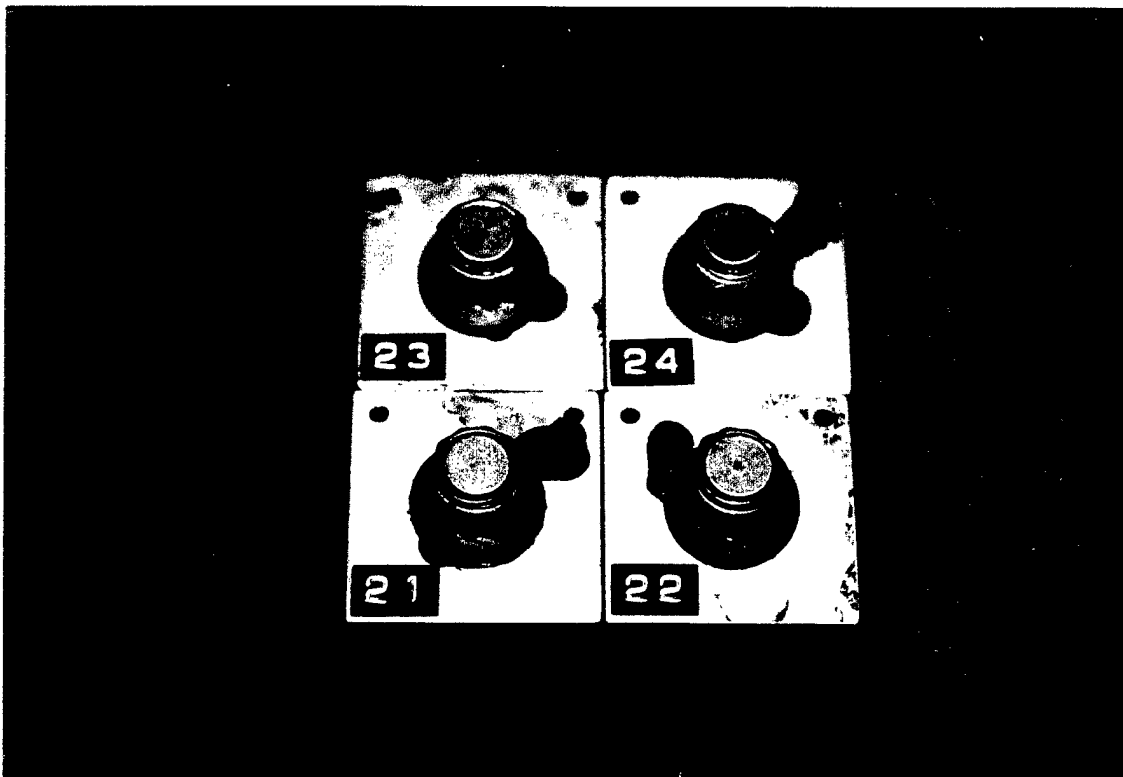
H11 Chromium Hot Work Tool Steel Nuts With Cadmium Electroplate Before Salt Spray Exposure. Reduced 25%.
